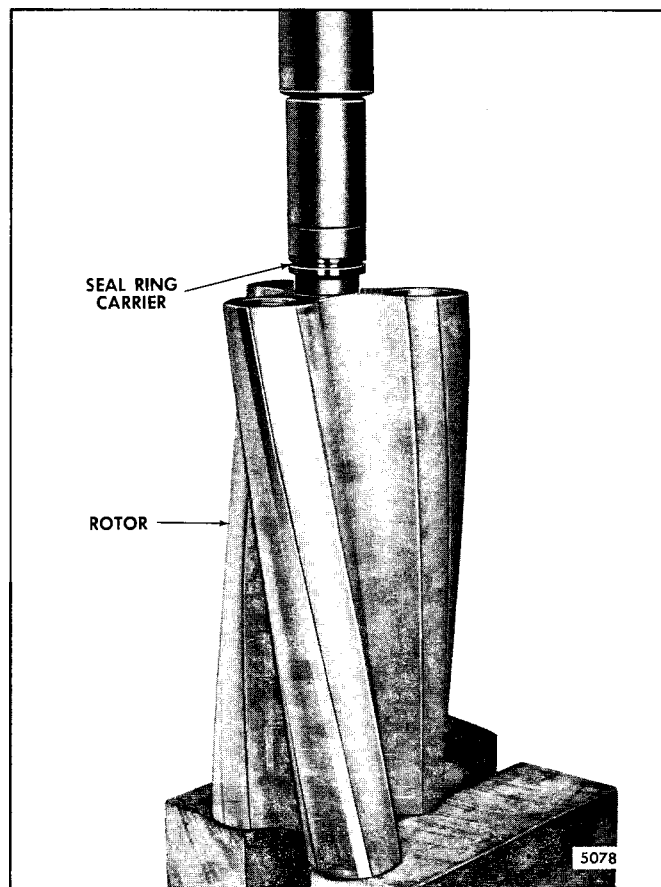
4 - Installing Oil Seal Ring Carrier on Blower Rotor Shaft
